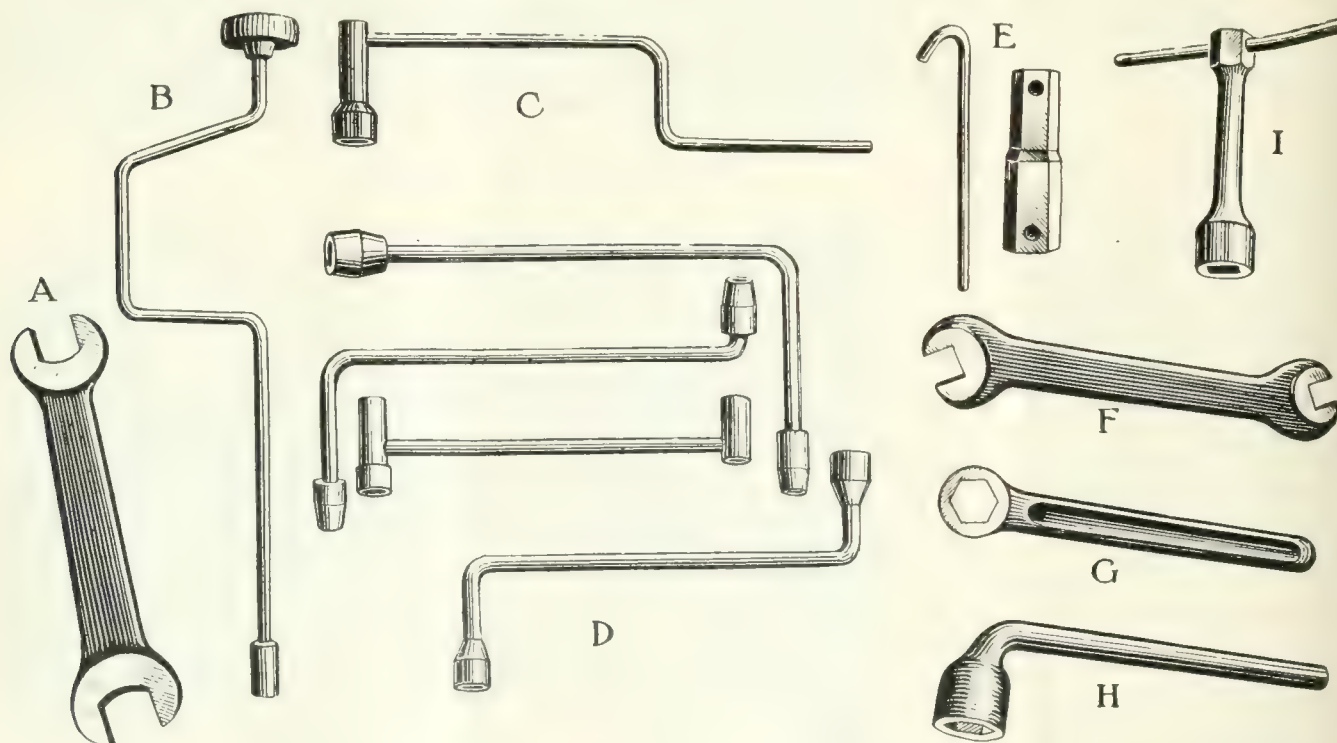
Types of solid and socket wrenches. A—Angle and solid wrench; B—Speed wrench; C—Special socket to get at otherwise inaccessible nut; D—L socket wrench; E—Spark plug wrench; F—Set screw wrench; G—Hexagon box wrench; H—L socket wrench; I—T socket wrench
